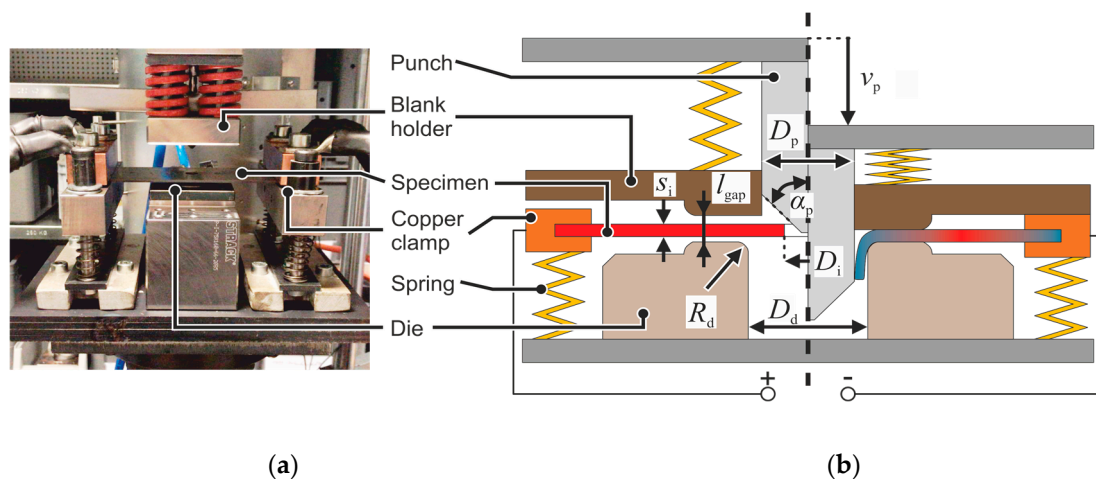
(a) Implementation of hot hole-flanging in a Zwick Z250 universal testing machine; (b) Schematic setup of hot hole-flanging.
